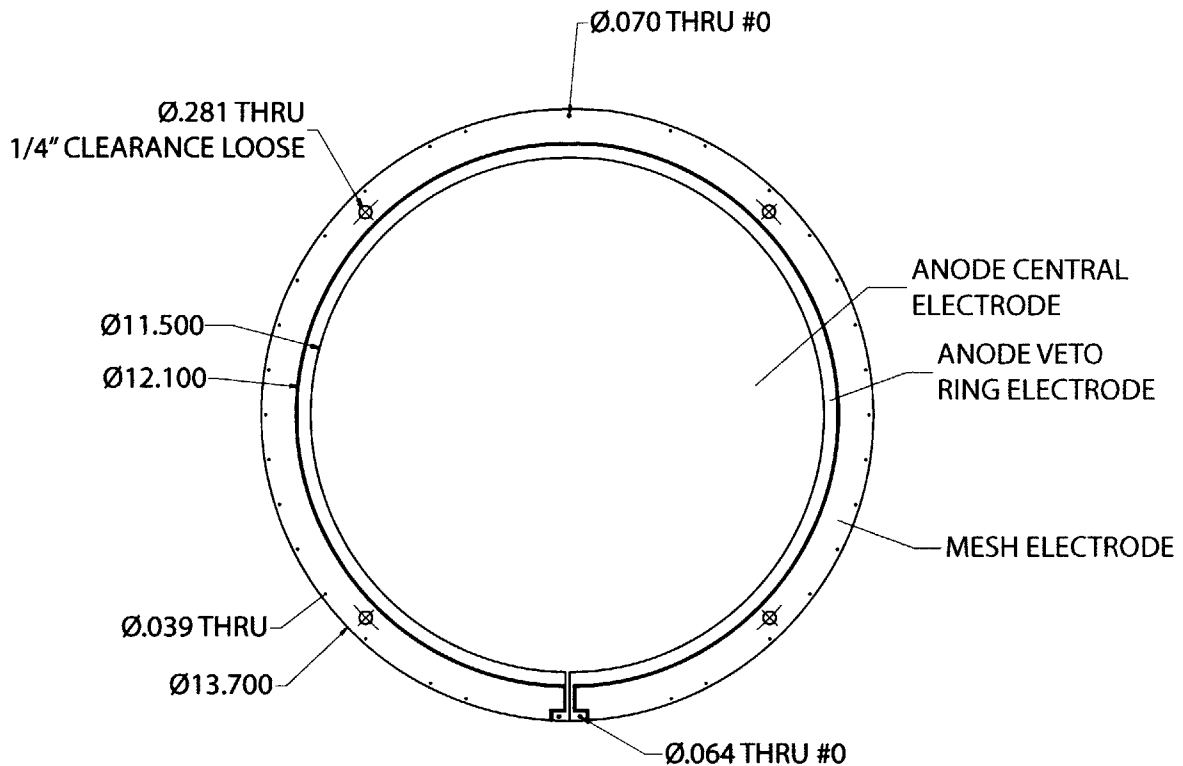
A CAD drawing of the anode plate with dimensions and electrodes labeled. All given dimensions are in inches.
